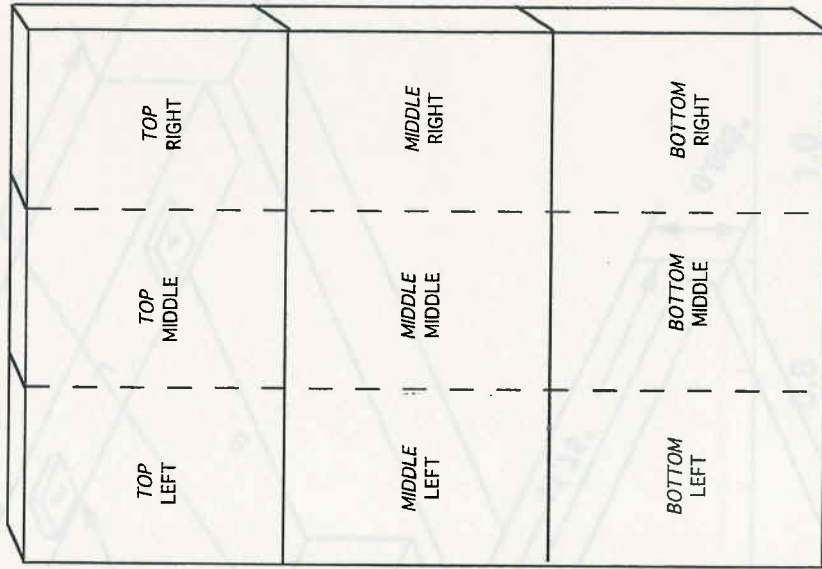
Preform dimensions and coupon locations with respect to tube/panel.
